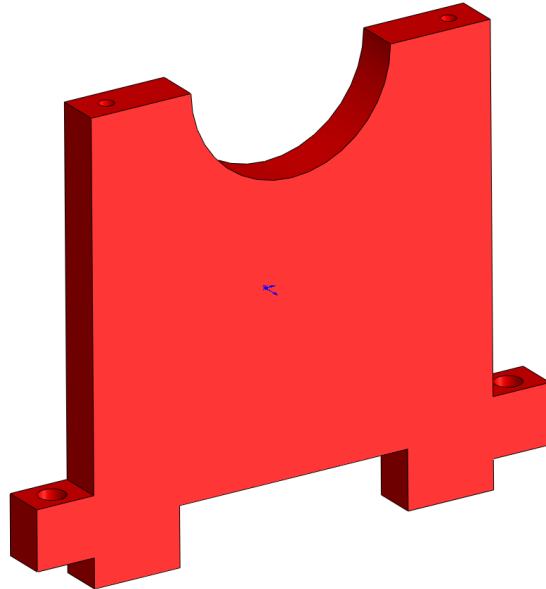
Vacuum seal support for flanges of with a diameter of 69.5 mm.
